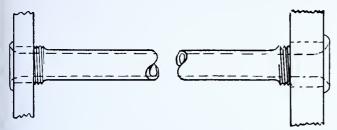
Stay Tube Expanded, Flared, Calked and Beaded
